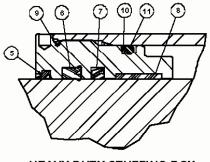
Standard cylinder assembly of seal(s), wiper, backup and o-ring.
